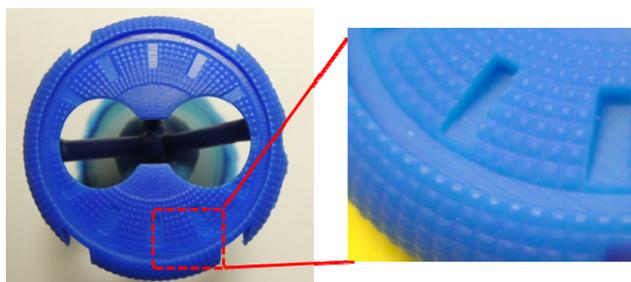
The “Master” for casting made of wax using a 3D printer.
